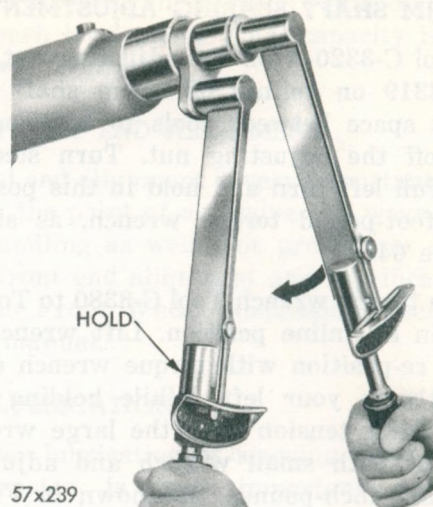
Adjusting Worm Housing Bearings (Outer)
